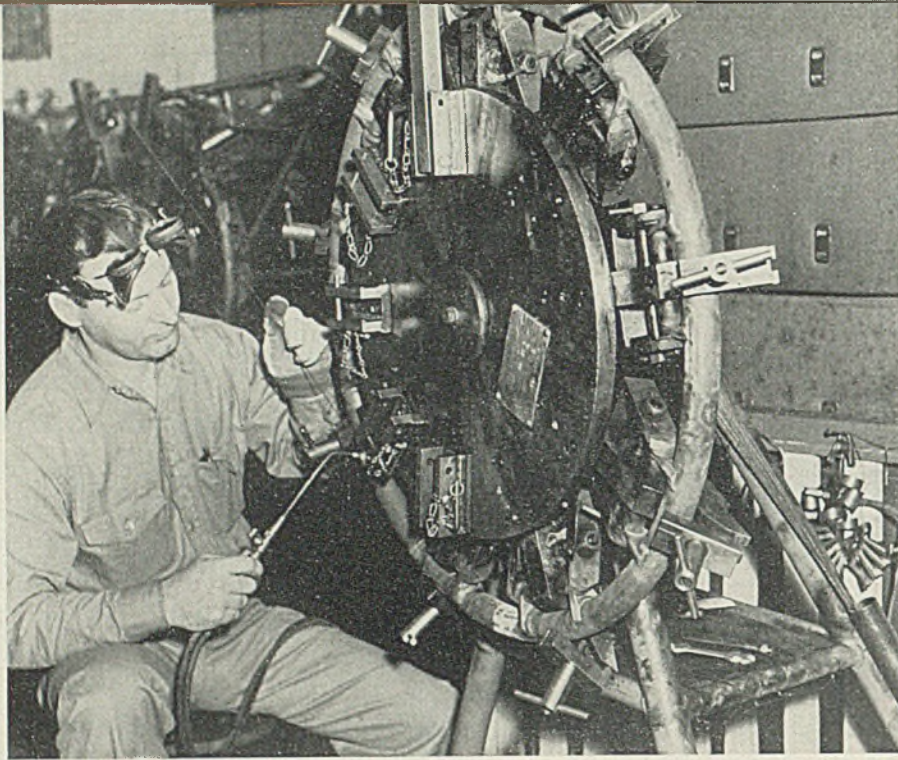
Engine mount welding jig of single operator type as used at Lockheed Aircraft Corp., Burbank, Calif.
